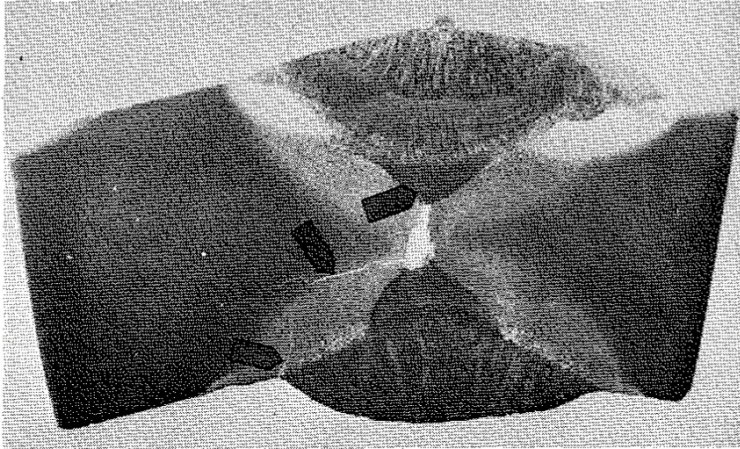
Butt weld of the sonar flange plate. Root and toe cracks, as well as lamellar tearing are indicated by markers. After ref. 37
